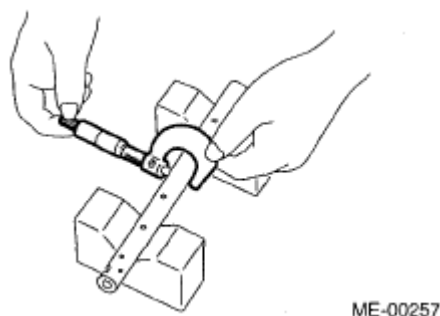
Measuring Outer Diameter Of Valve Rocker Shaft
